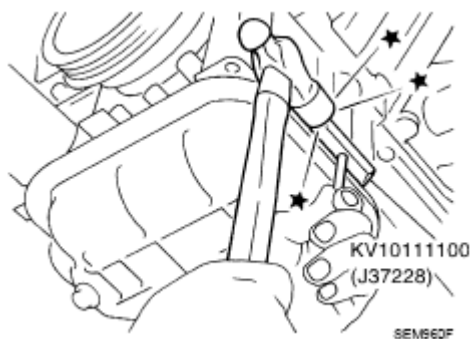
Inserting Seal Cutter (SST) Between Oil Pan (Upper) And Oil Pan (Lower)
